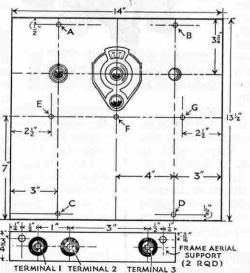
Diagram showing front panel layout and frame support dimensions.
